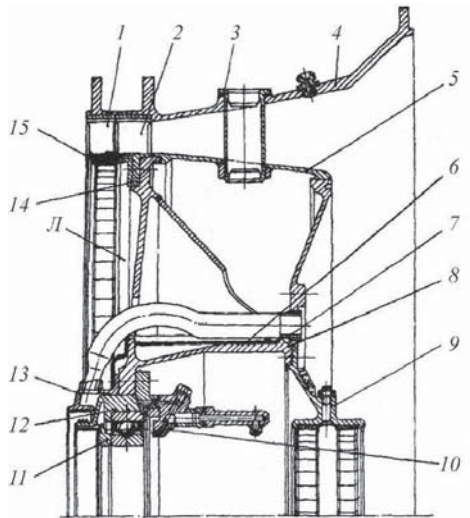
Rear compressor housing of the D050 engine [15]:
